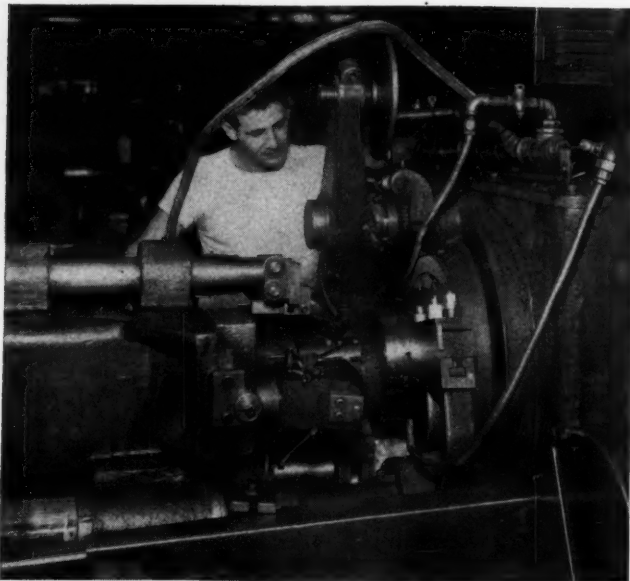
Above—Probably the largest automatic screw machine used today, this model handles 10½-in. stock
